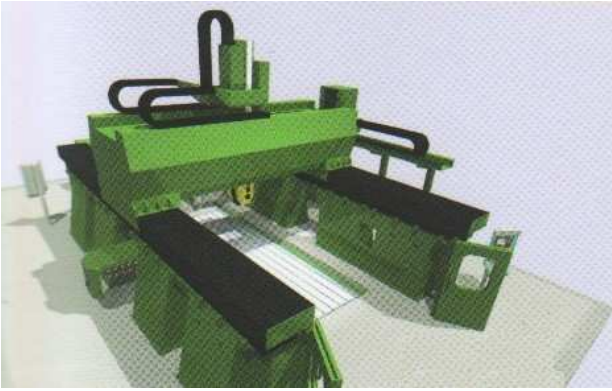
Structure with crossrail sliding on a “high bed” replacing two columns.
